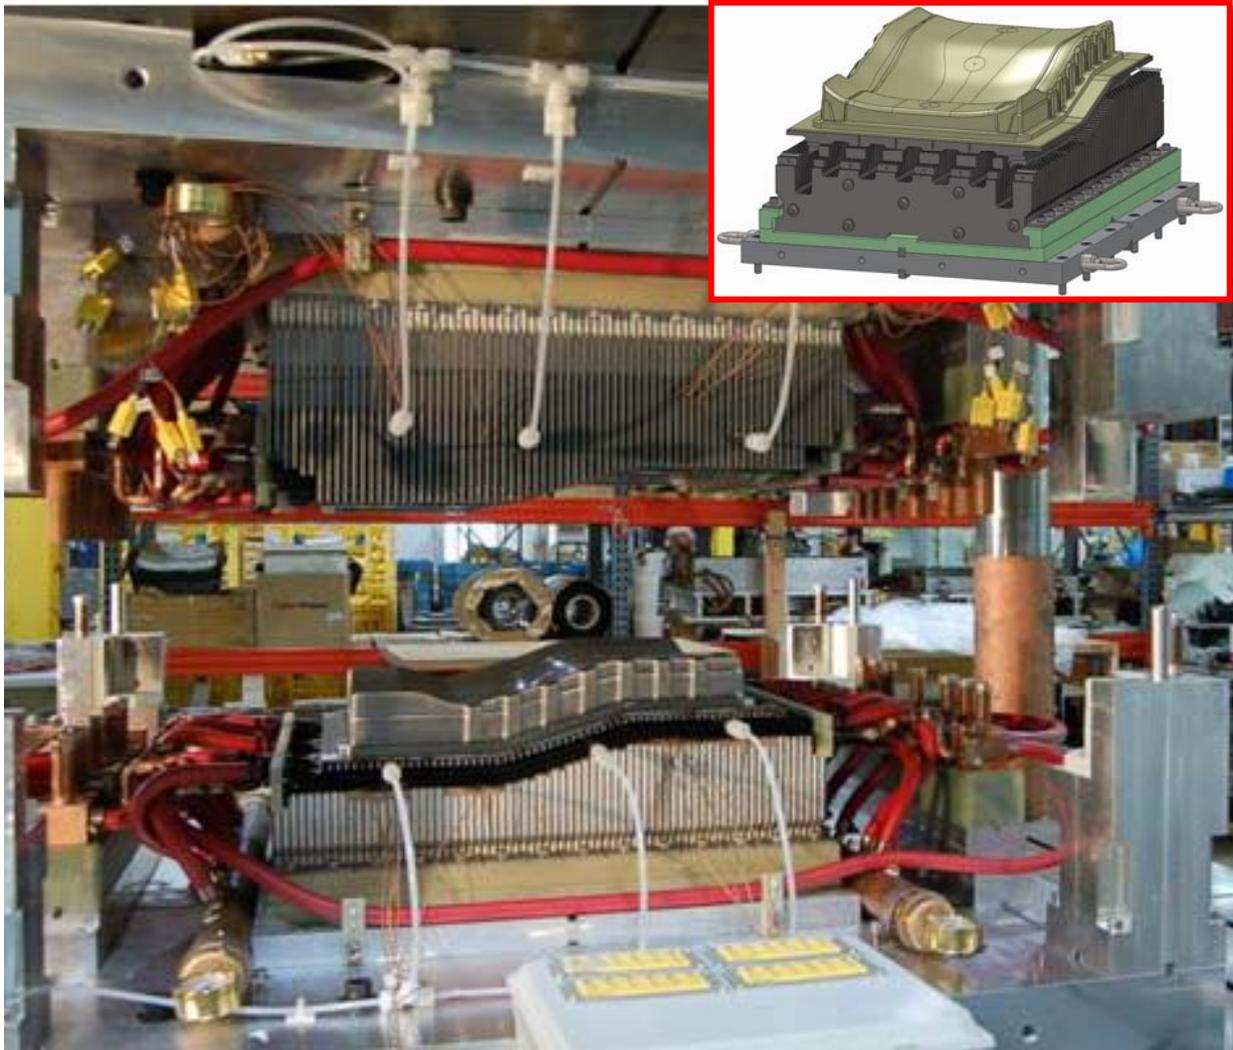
Ford set pan tool installed in the induction processing system and ready to begin part molding
